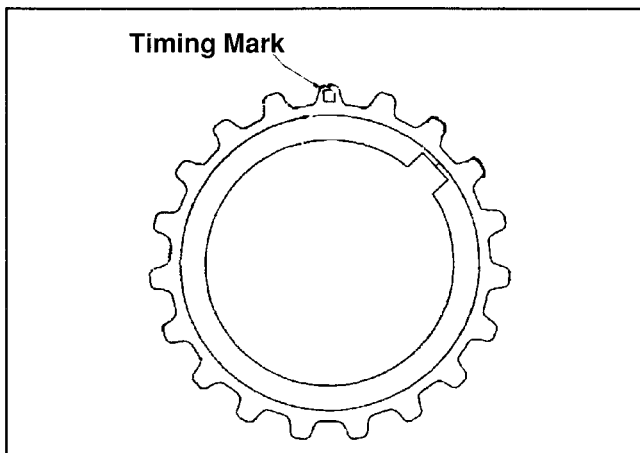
Setting #1 Cylinder at Top Dead Center.
